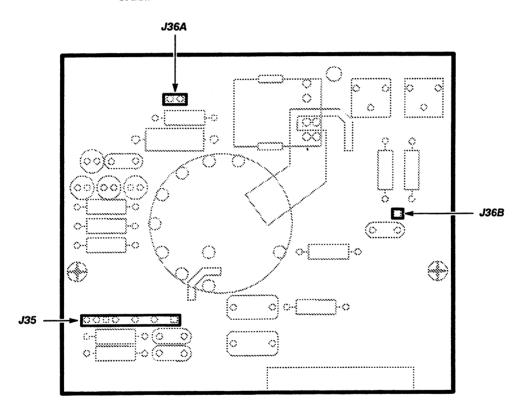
Removing/Replacing the A27 CRT Socket Board
